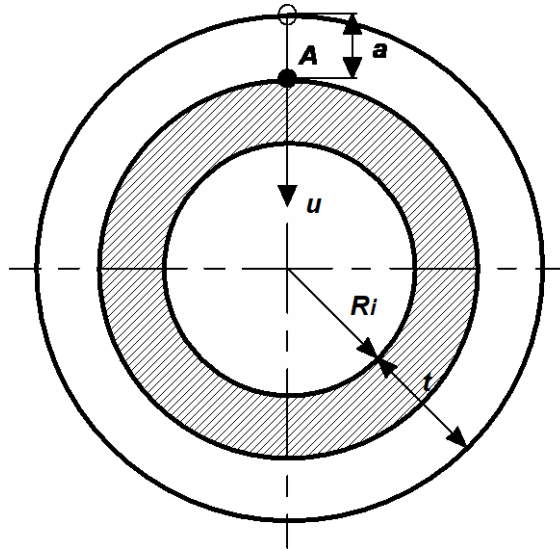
Complete circumferential external surface crack in a cylinder.
